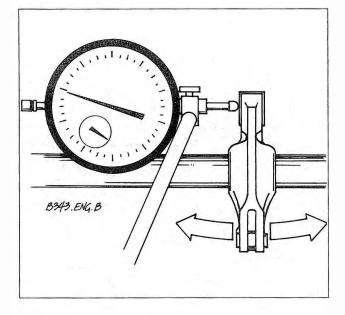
Dial indicator being used to check rocker arm wear.
